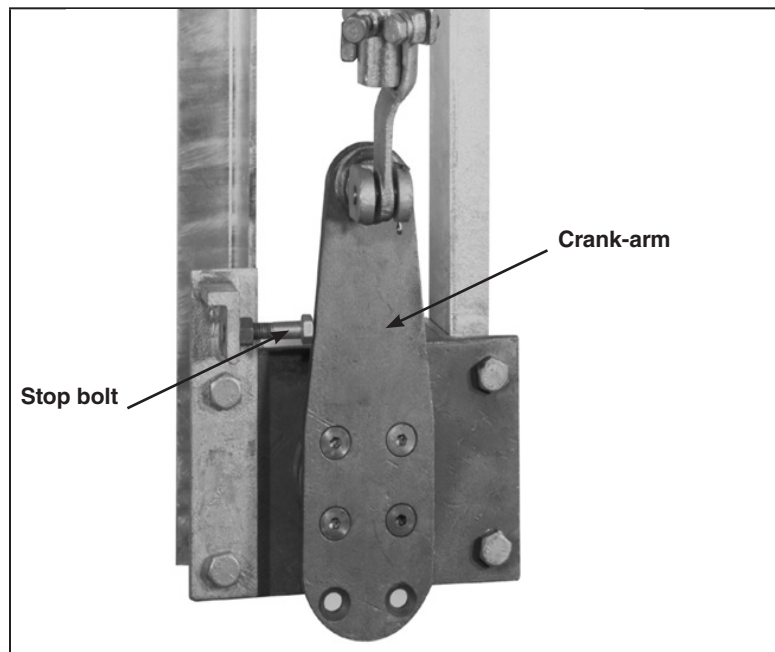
Adjust the outboard bearing crank-arm stop bolt.
